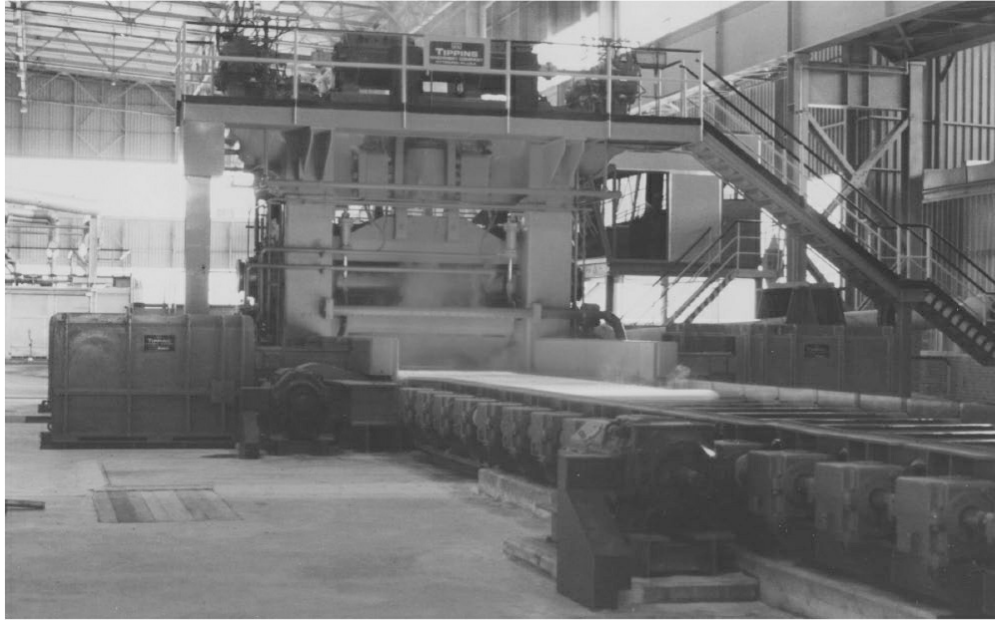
Hot mill rolling plate for further reduction through hot strip mill. (*Courtesy of Tippins Machinery Company, Inc.*)
